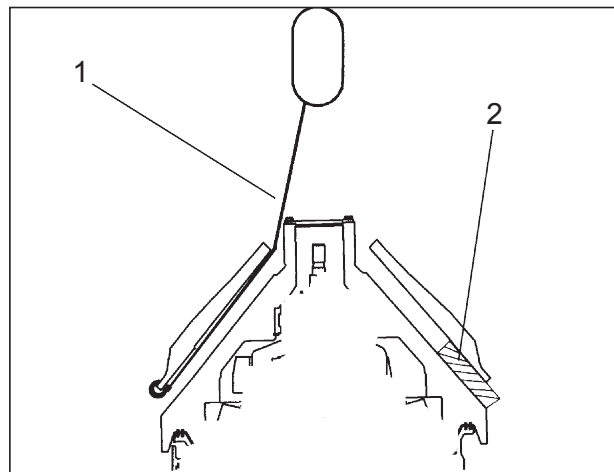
Lifting Chains Correctly Fitted Sections through the Cone Head
